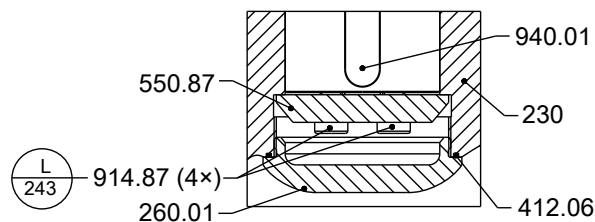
Fitting K impeller on pump with bearing bracket S09/S10
